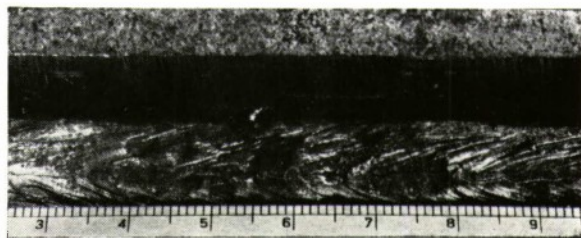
(a). Example of cracking in the root run of weld. Surface view.
